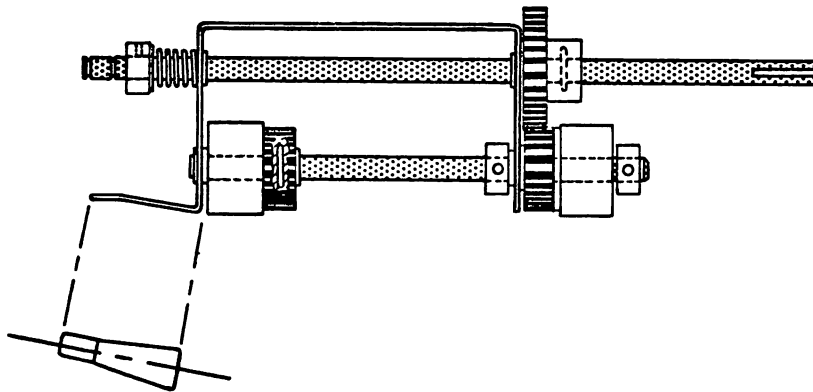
HOPPER & FEEDER ASSEMBLY - LEFT SIDE VIEW
